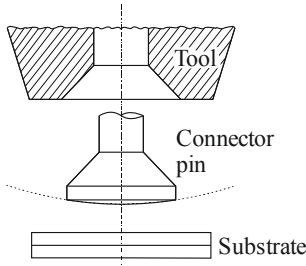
Tool, pin, substrate assembly used for experimental setup
